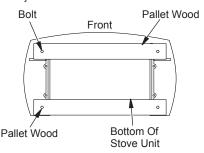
Removing Pallet Wood From The Bottom of The Stove
